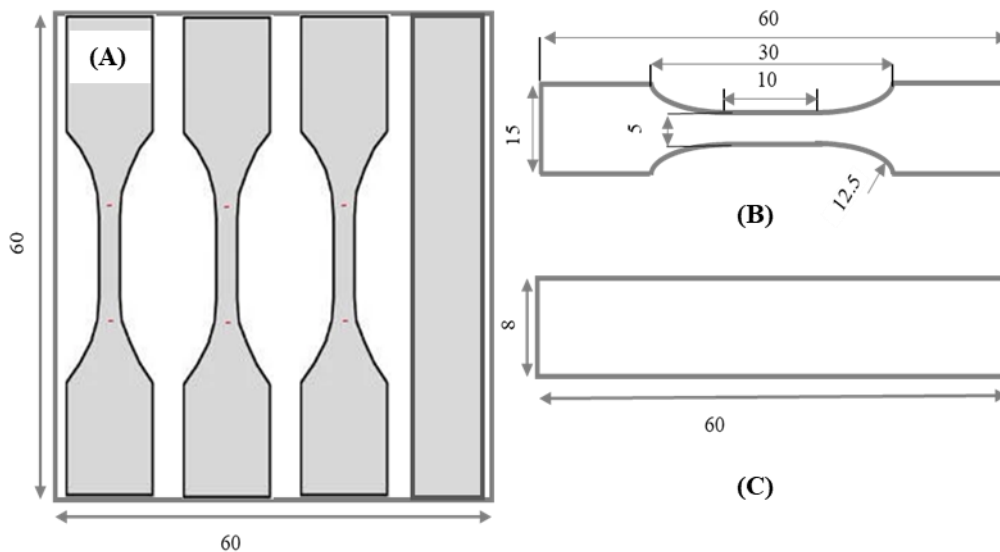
(A) Plan of cutting with detail dimension (B) Dog bone sample for tensile test (C) Rectangle sample for bending (all dimensions are in mm)
